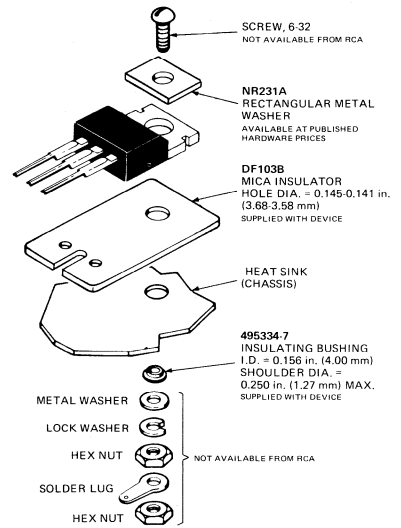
Suggested mounting hardware for use with JEDEC TO-220 AB package.
